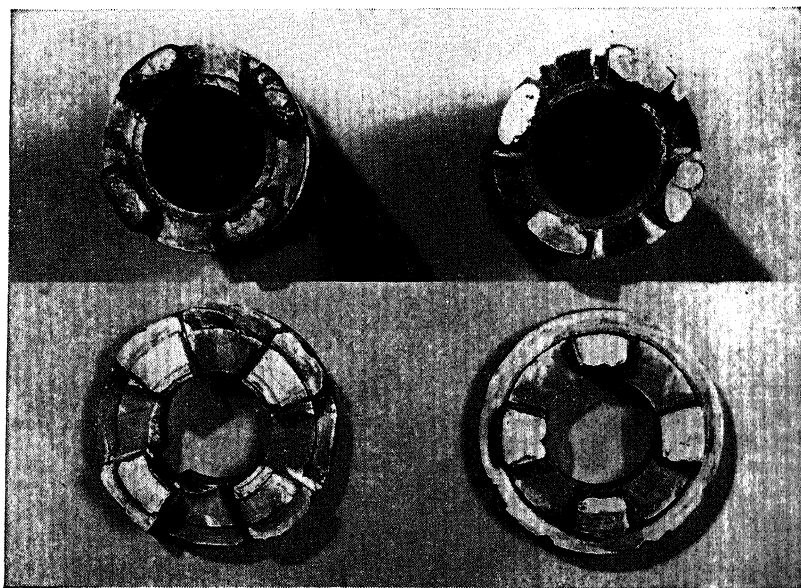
Parts for clutch collar in two-speed transmission of lumber mill engine. Worn prongs are built up with tool steel electrode, saving \$9.00 per collar and greatly prolonging their life.
